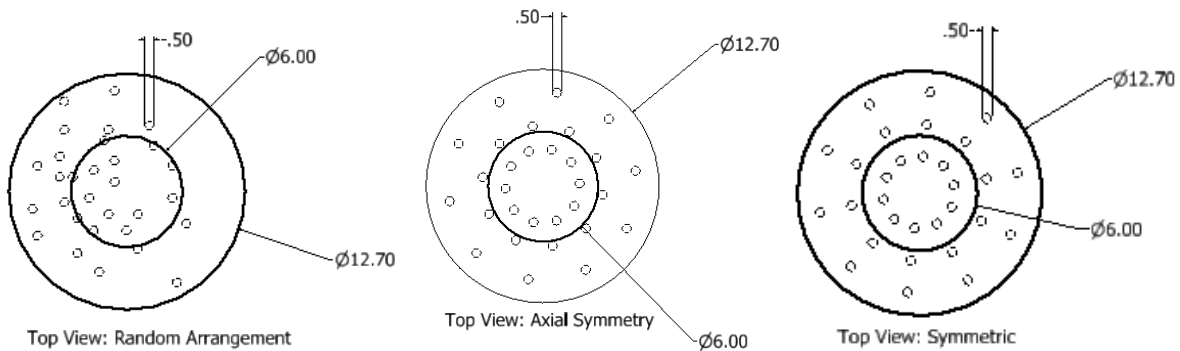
Cross-sectional view of CAD models (a) Tube_C1 (b) Tube_C2 and (c) Tube_C3/C4/C5
